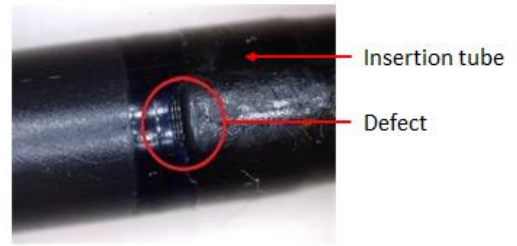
Defects of reusable FOB deflection tip of the insertion tube
